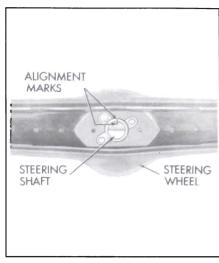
Steering Wheel and Shaft Alignment Marks
